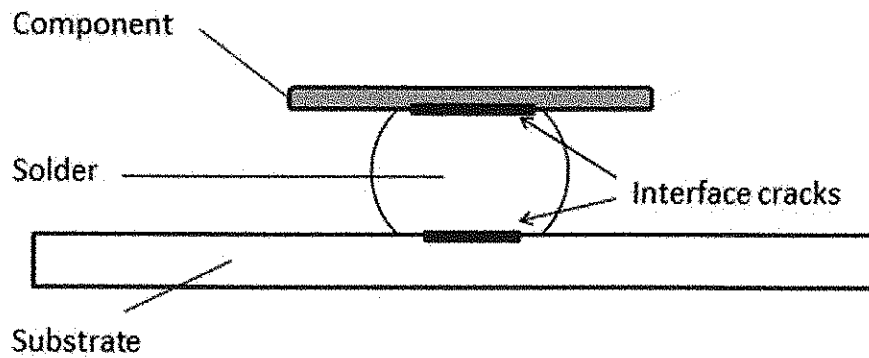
Possible locations of solder interface crack (indicated by thick bold lines)
